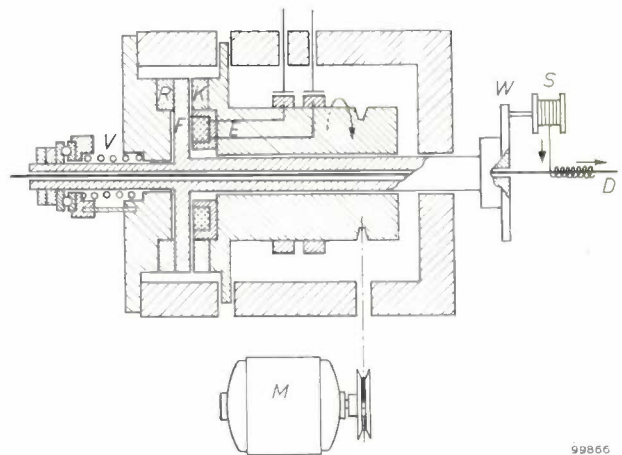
Sketch of the winding machine. *M* motor. *W* winding head. *S* bobbin with tungsten wire to be wound on mandrel *D*. *F* flange fitted to the winding-head spindle. *E* electromagnet, which, when energized, pulls the flange against clutch plate *K*, so that the winding head is driven by the motor. *V* spring, pressing the flange to braking disc *R* when the electromagnet is not energized, thus stopping the winding head.
